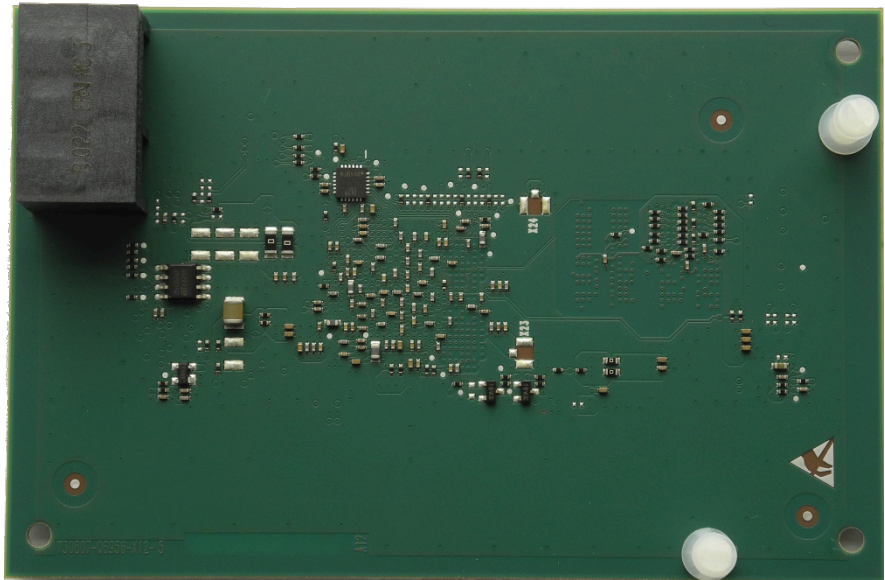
Example OCCBL – Rear side with inserted spacing bolts
